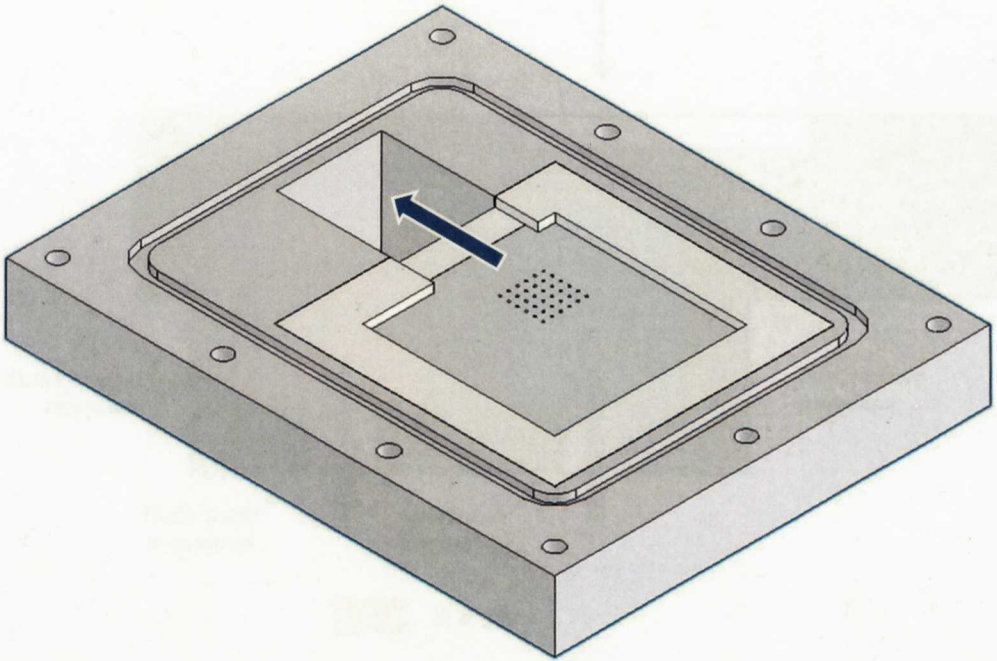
CAD drawing of the test assembly. The arrow indicates the direction of the water flow after impingement.
